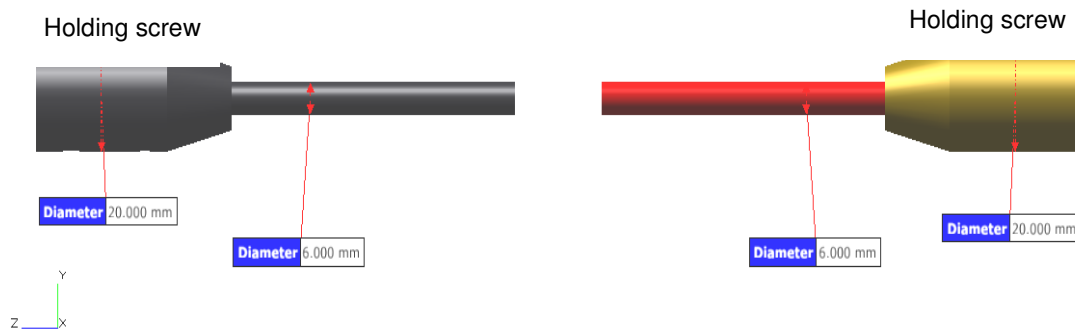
Shows holding screw giving proper gripping to the electrodes
